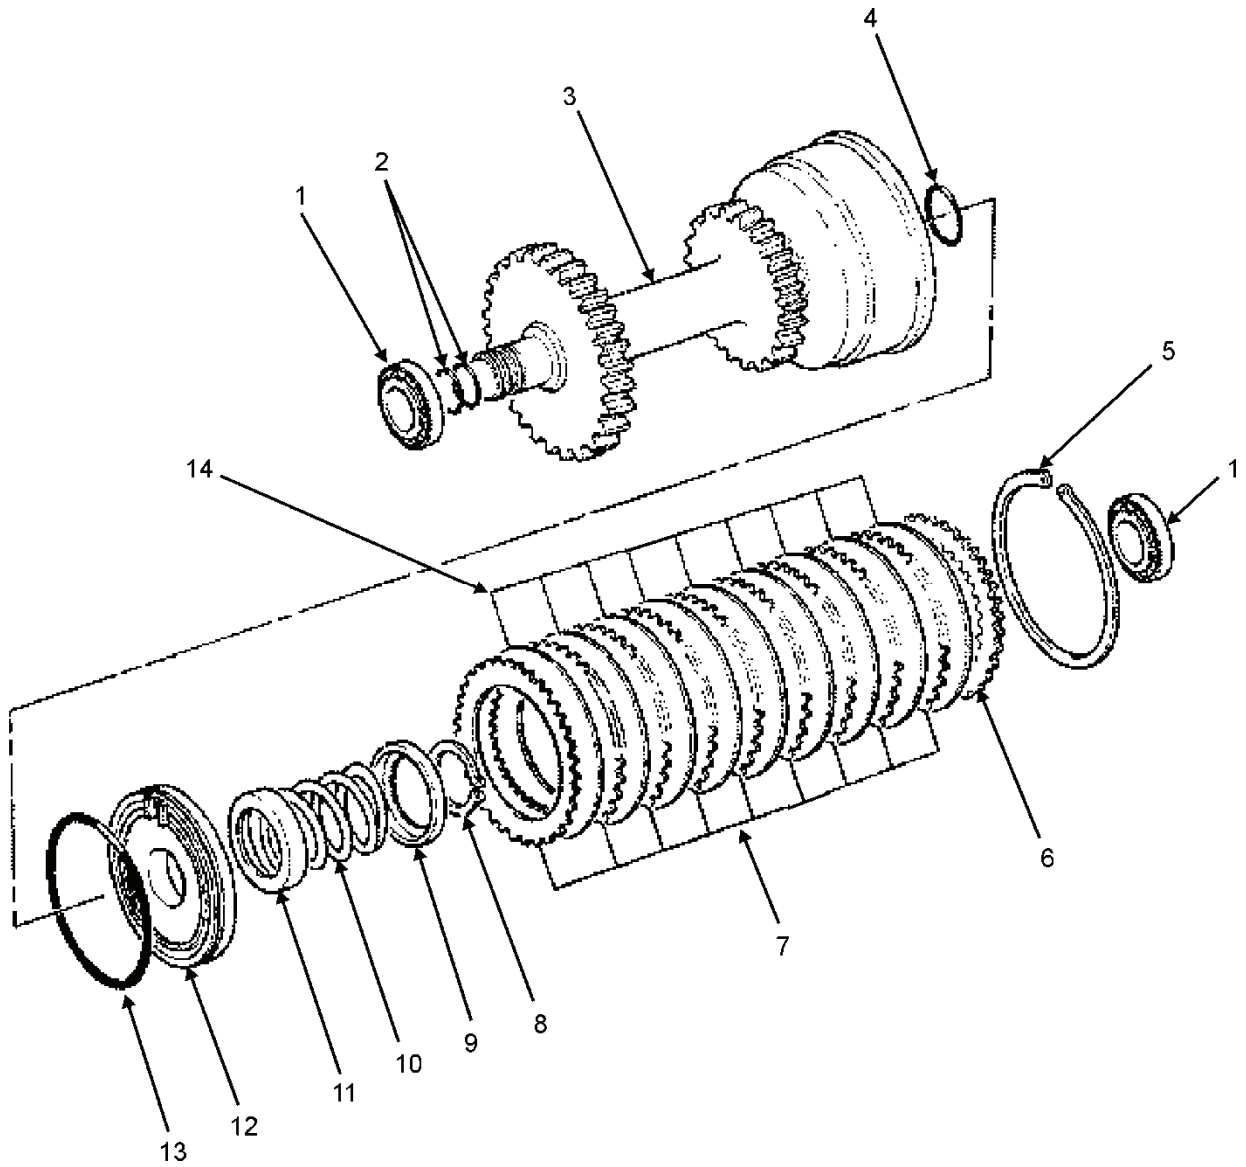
TRANSMISSION - MAINSHAFT CLUTCH
